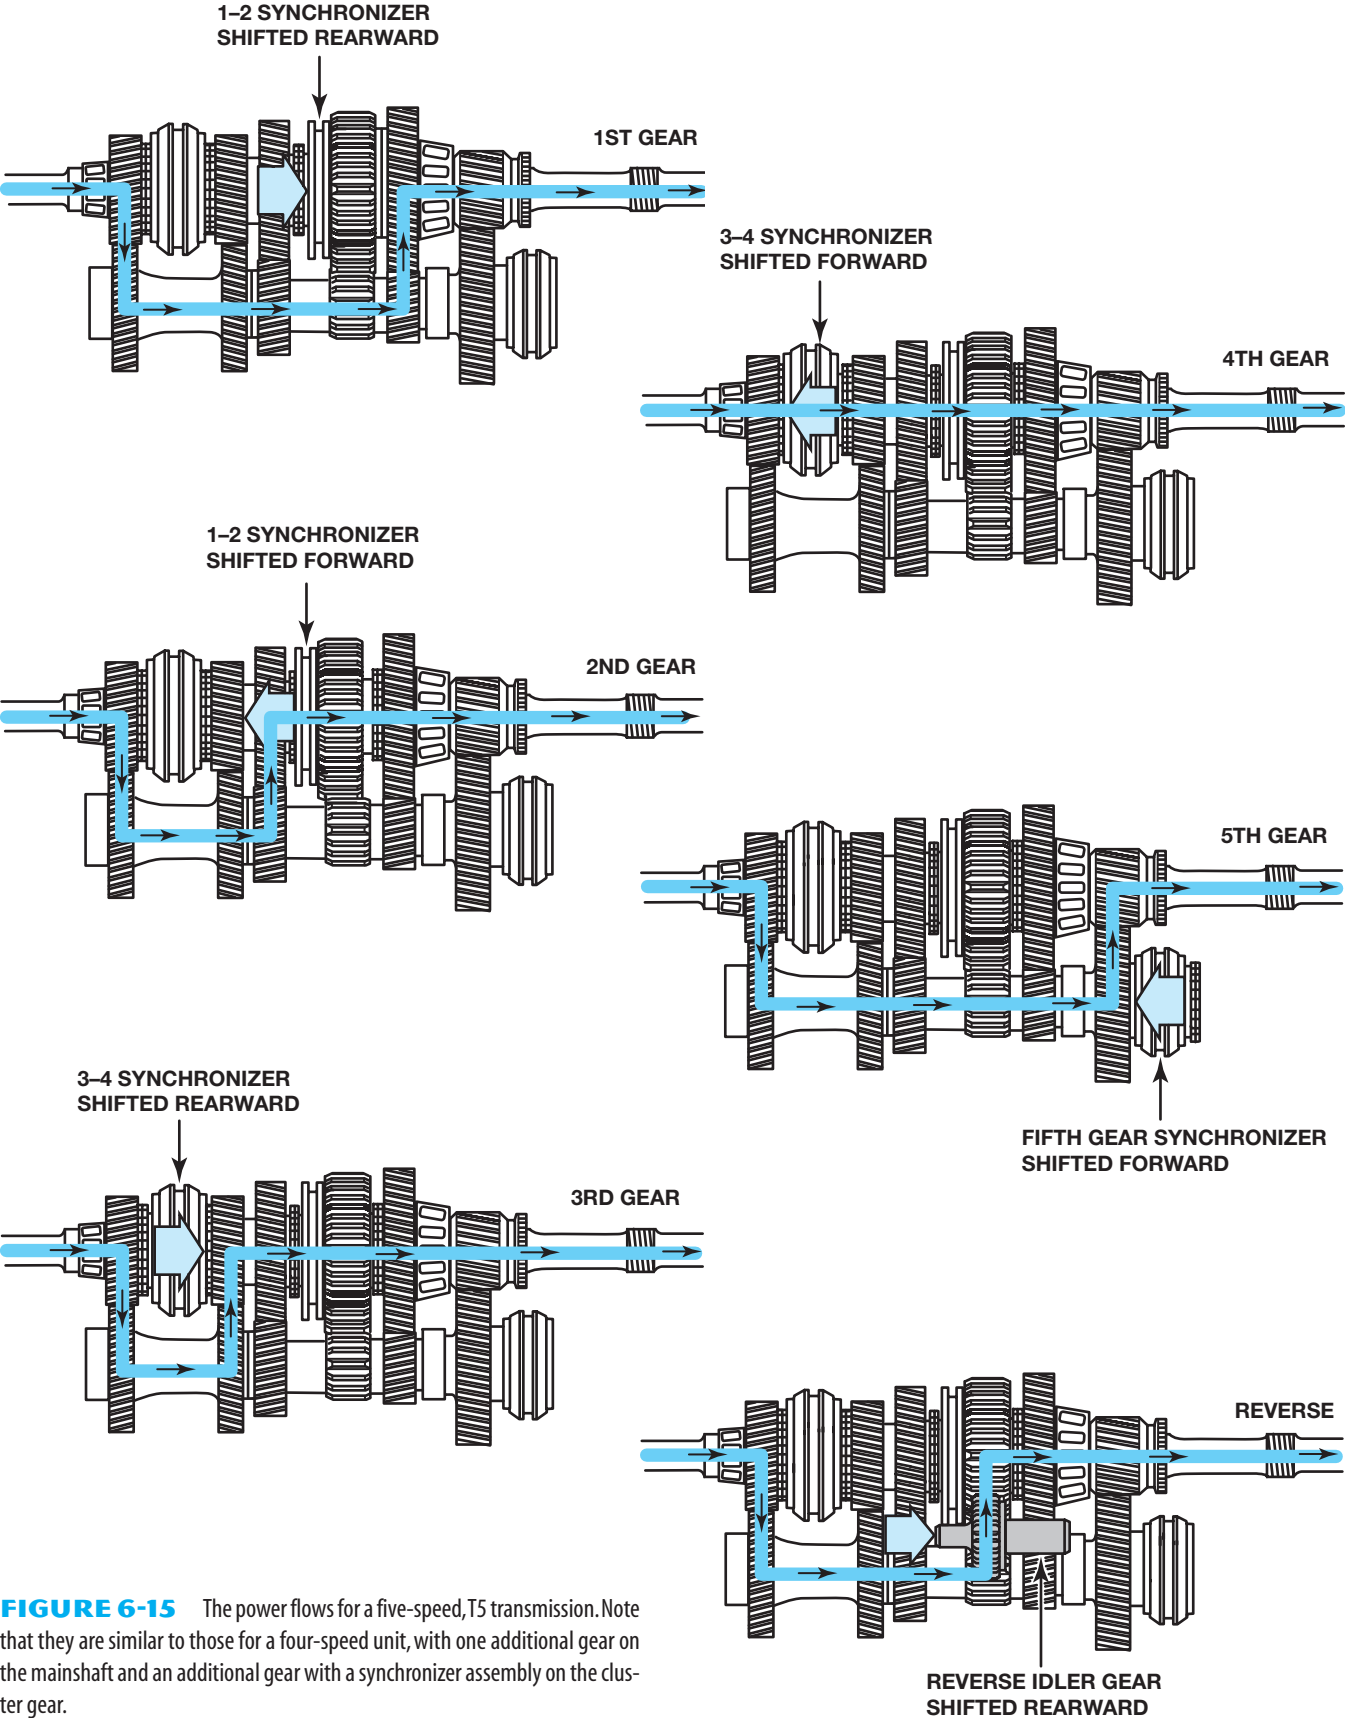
The power flows for a five-speed, T5 transmission. Note that they are similar to those for a four-speed unit, with one additional gear on the mainshaft and an additional gear with a synchronizer assembly on the cluster gear.
